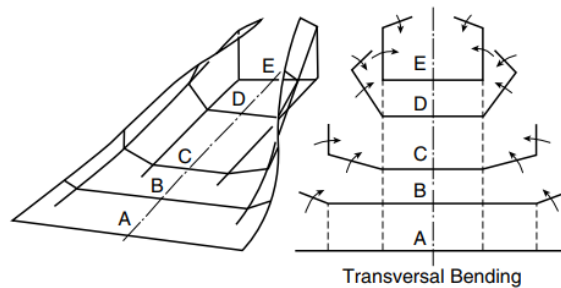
Flower diagram depicting the transversal bending of the sheet metal throughout each roll forming pass [Halmos, 2006].
